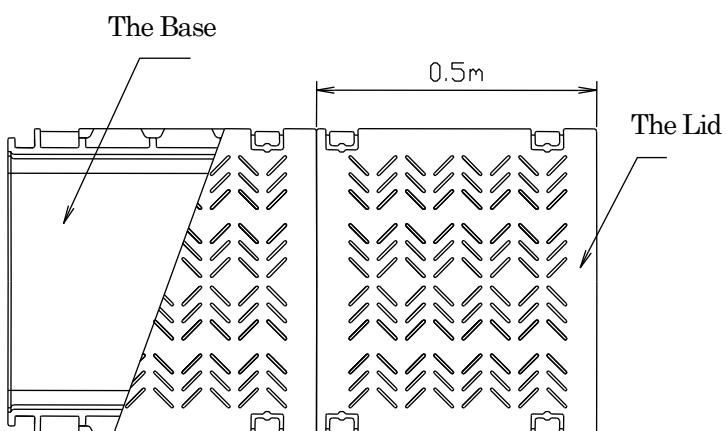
Structure (Assembly drawing of 250, 400, 430)
